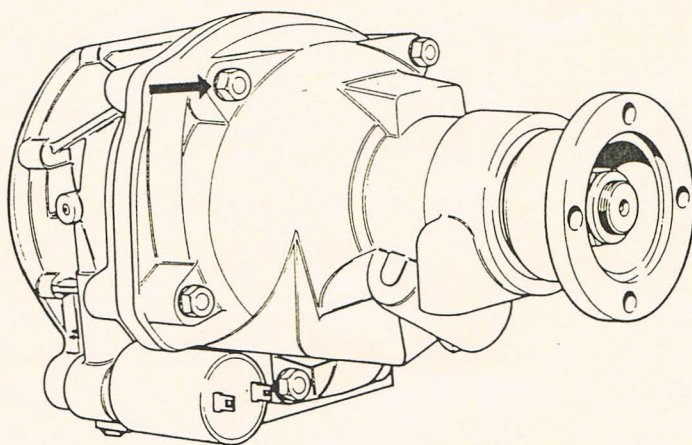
RE-FITTING MAIN CASE ASSEMBLY
